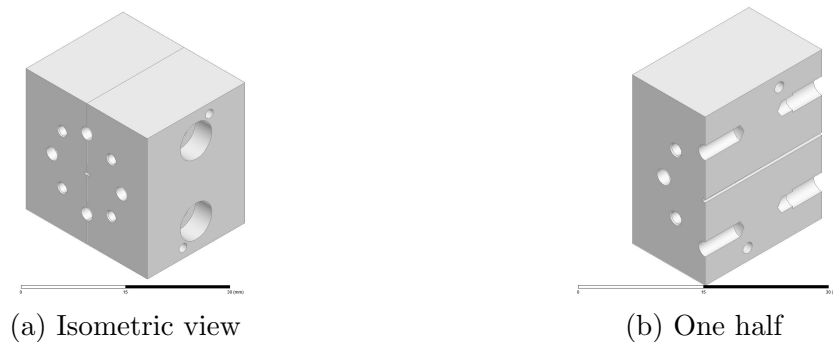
SolidWorks model of split block waveguide, including flange detail and holes for alignment pins and fastening screws.
